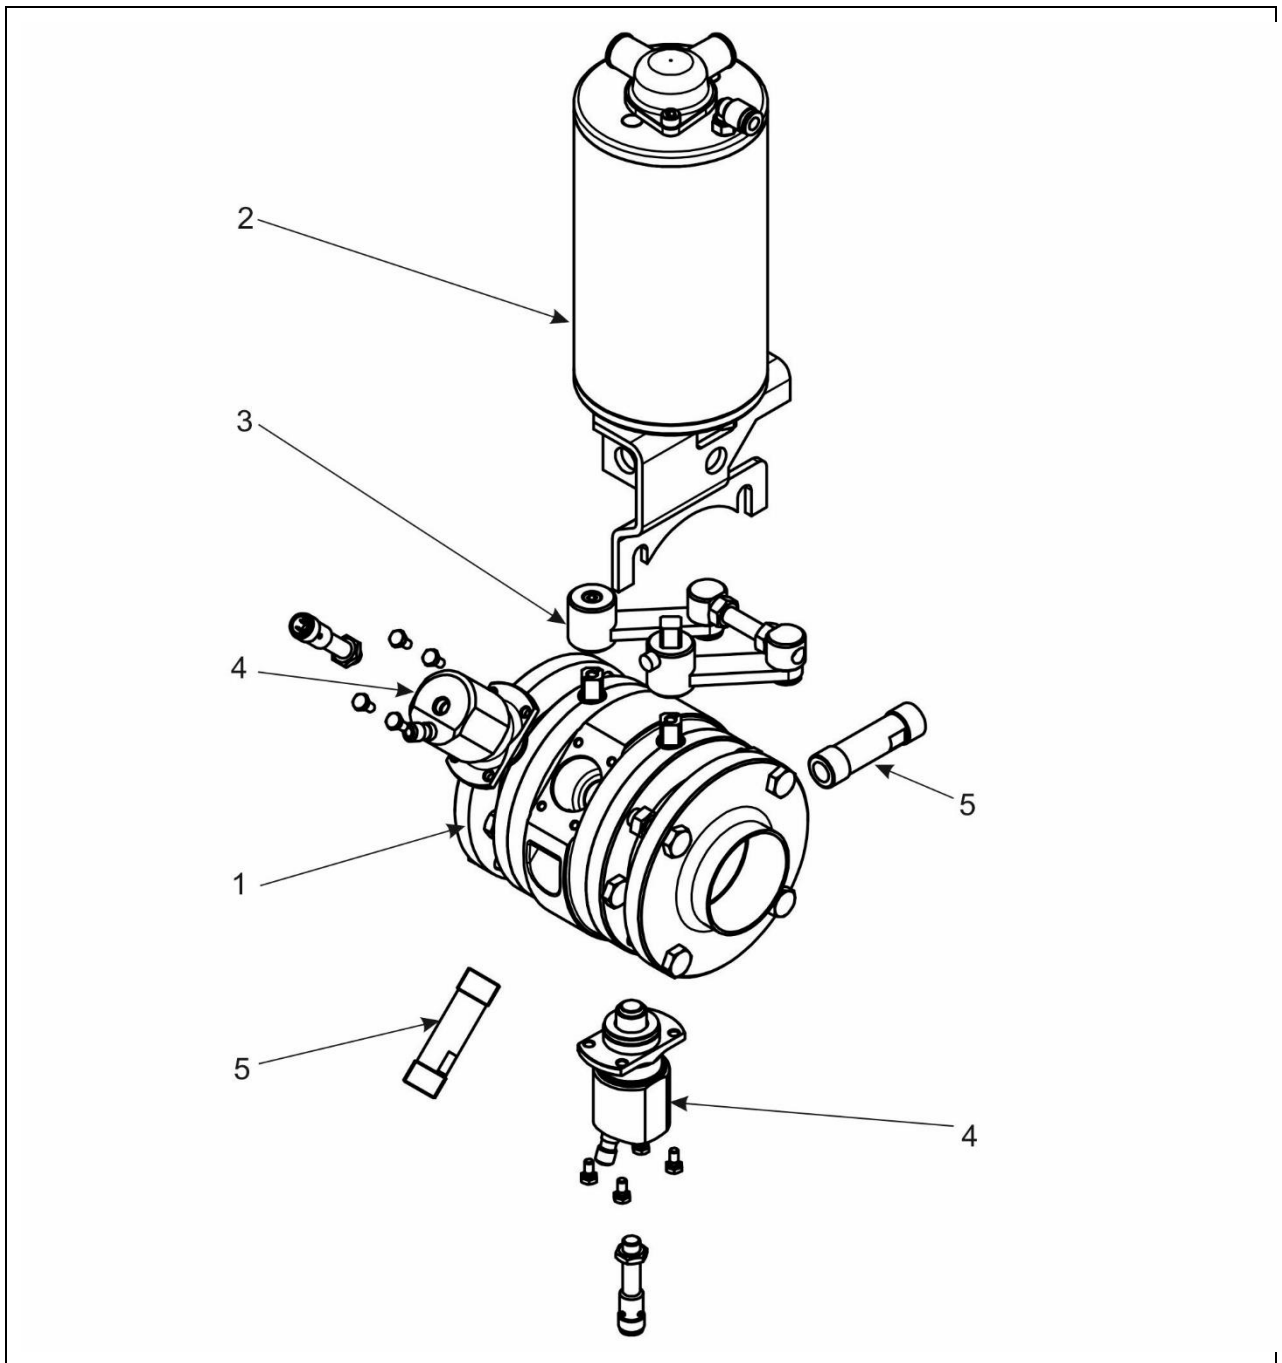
Overview of Leakage Butterfly Valve with Pneumatic Actuator
